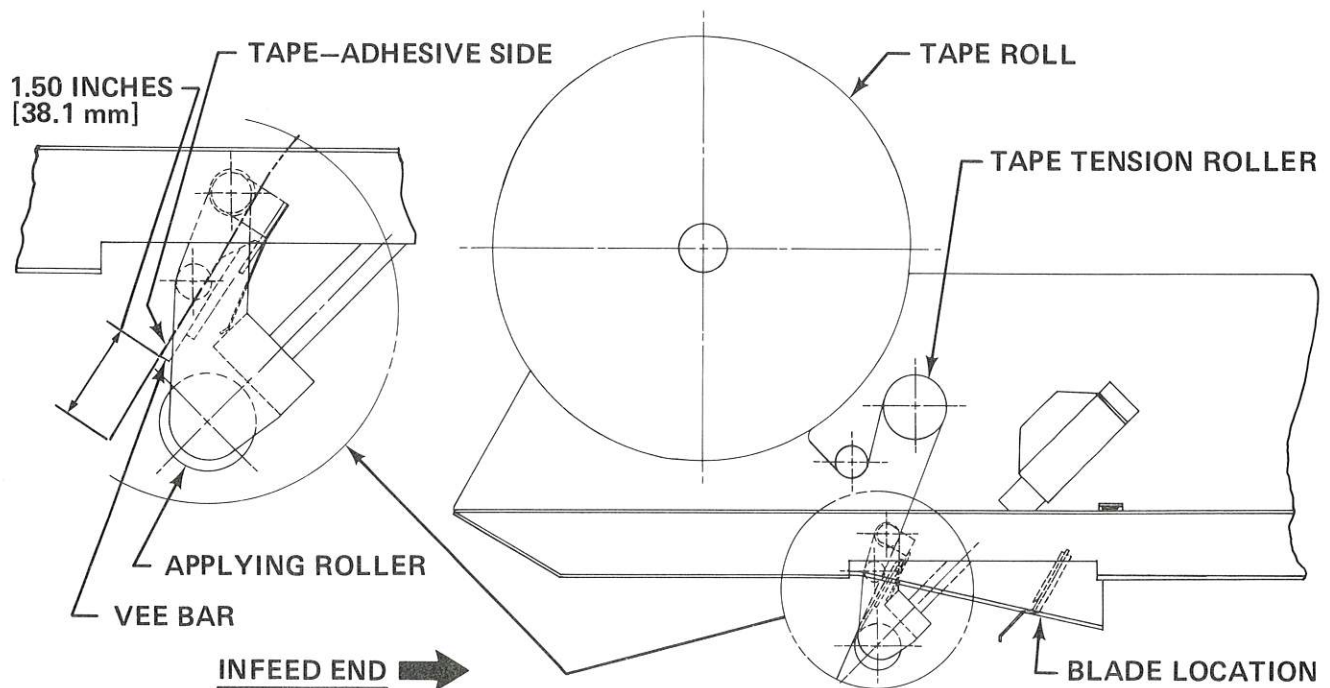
TAPE THREADING DIAGRAM - UPPER TAPING HEAD RIGHT SIDE VIEW
